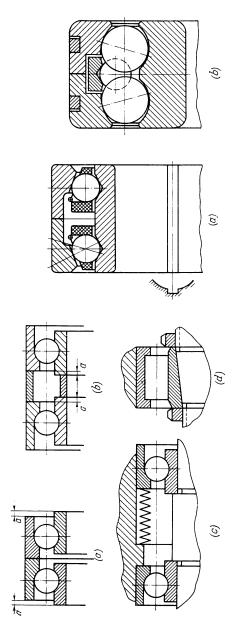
Double-row ball bearings preloaded in their assembly Fig. 58. Methods of preloading bearings
